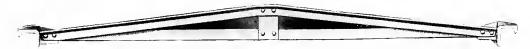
Western Steel Carline. Western Railway Equipment Company.
